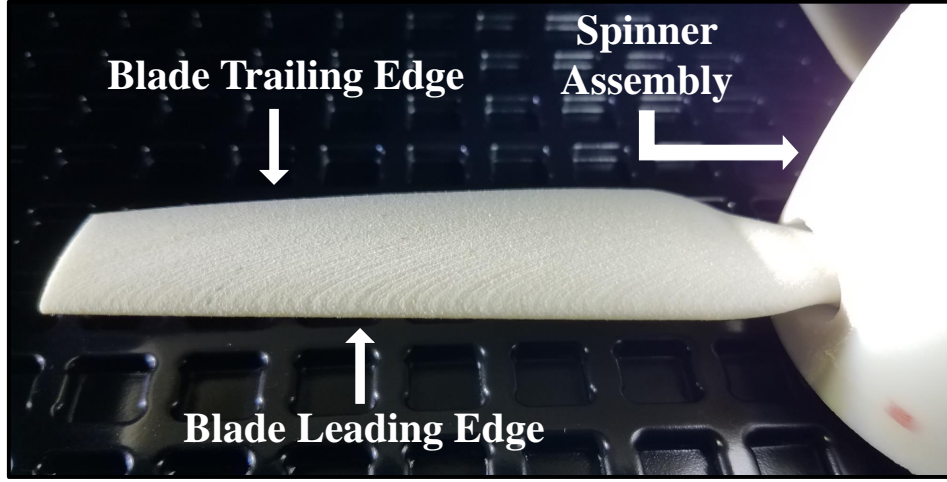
Close-up view of fabricated propeller blade illustrating blade surface roughness.
